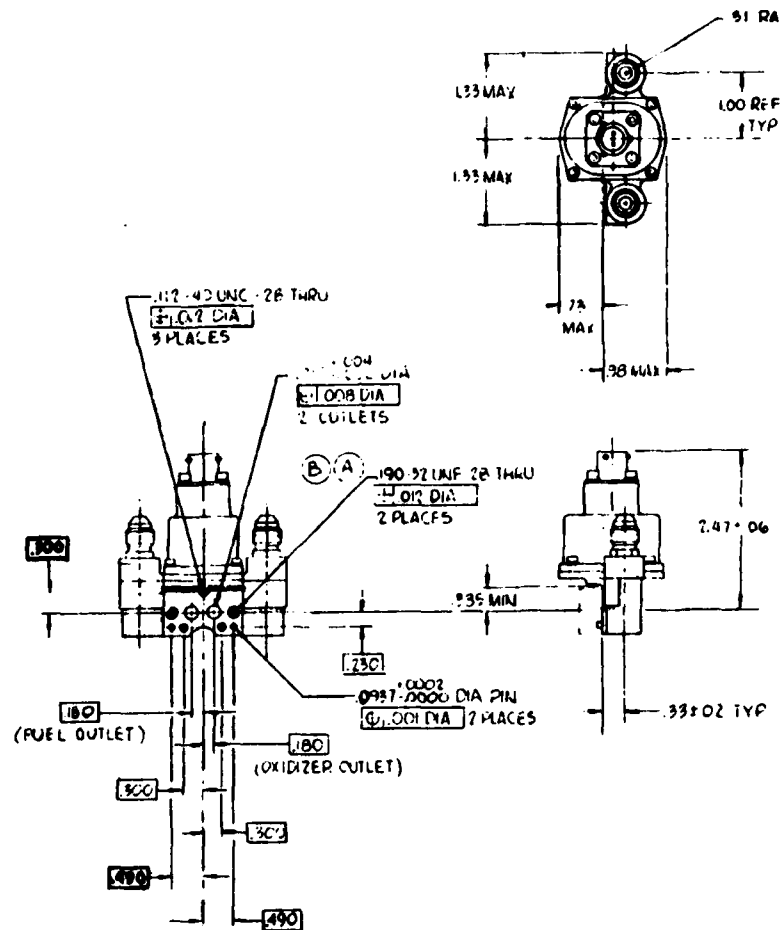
Torque Motor Valve Model 51E112 Assembly and Interface Drawing
